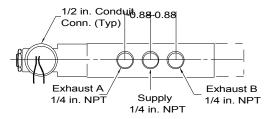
Solenoid Air Valve Dimensions (in.) and Air Connections
